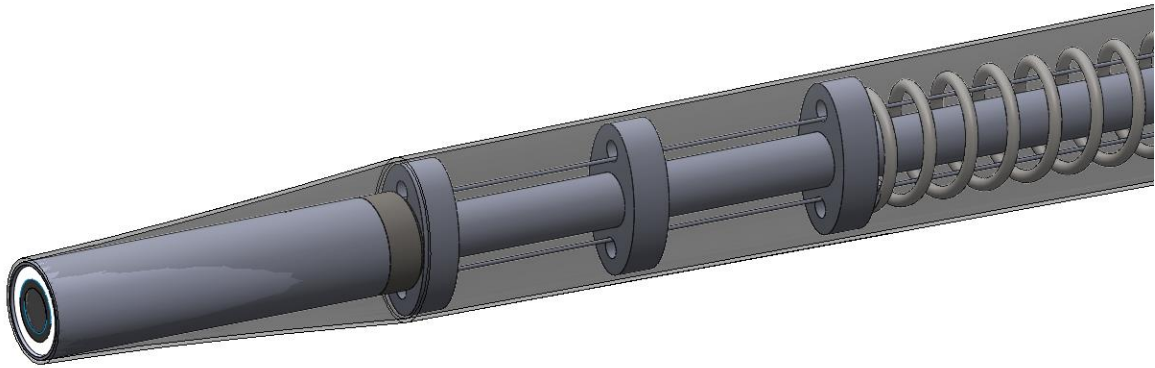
Prototype 4 Flexible Rod Closeup. The spaced wire guides are shown that allowed the diameter to be reduced while improving bending.
